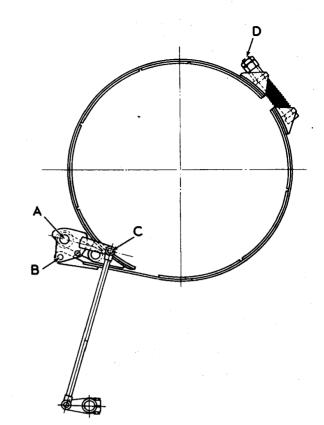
Forward Drum Brake Arrangement for Shovel, Straight Boom Dragshovel or Skimmer.
